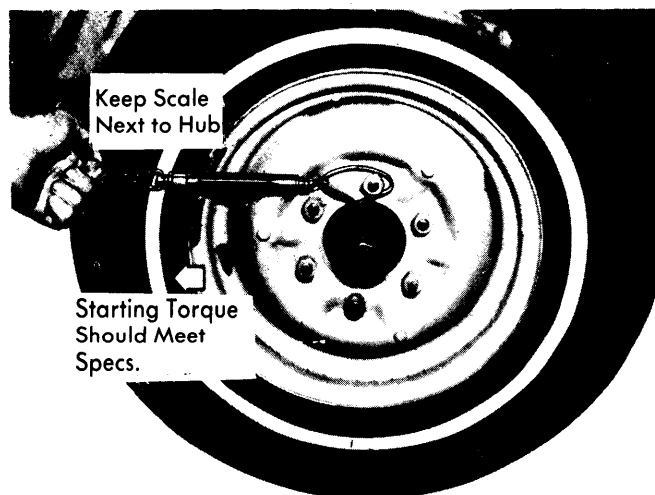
Using a Pull Scale to Measure Wheel Bearing Starting Torque
